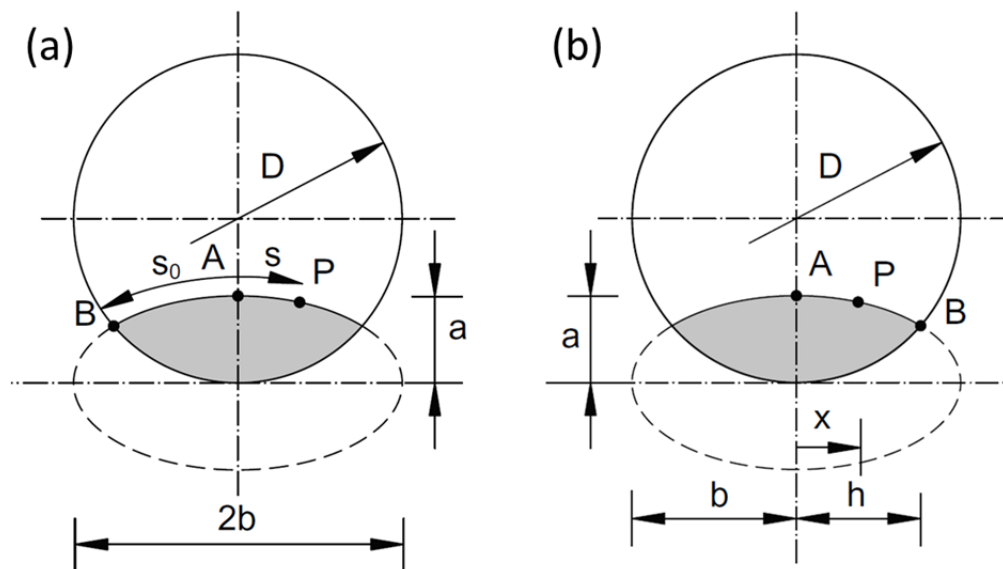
Crack dimension definitions used for K factor calculation in (a) Ref. [22] and (b) Ref. [17].
